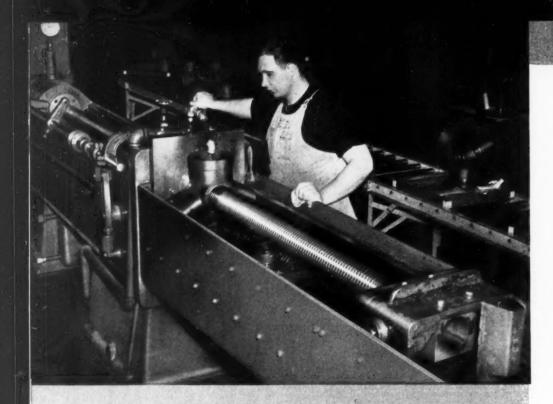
Broaching Large-Diameter Splines through the Cross-bore of a Hub Forging on a Horizontal Pull Type Machine
